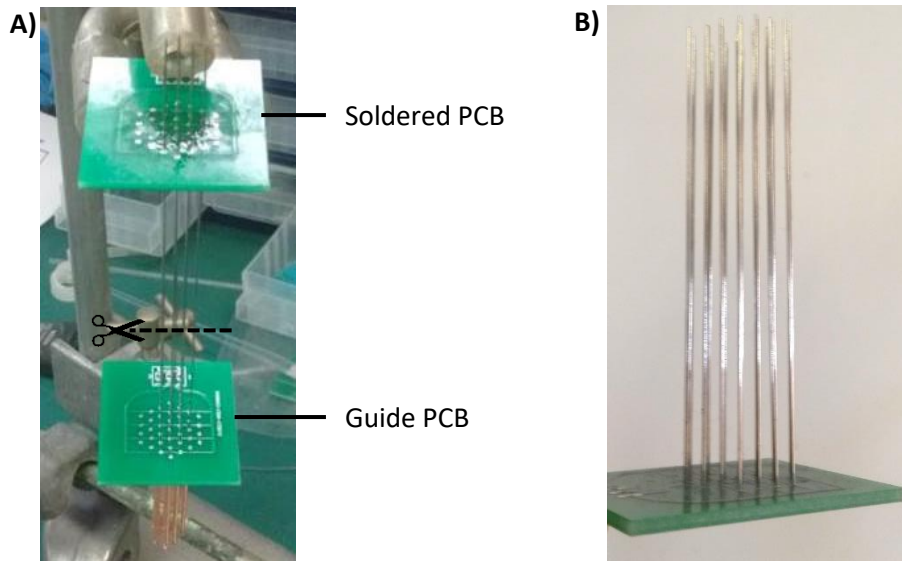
Soldering Electrodes to the PCB. A) Electrodes were fed through 2 PCBs, with one acting as a guide to keep the electrodes parallel. After all electrodes had been soldered to the base PCB they were cut to the desired length, removing the guide PCB and yielding B).
